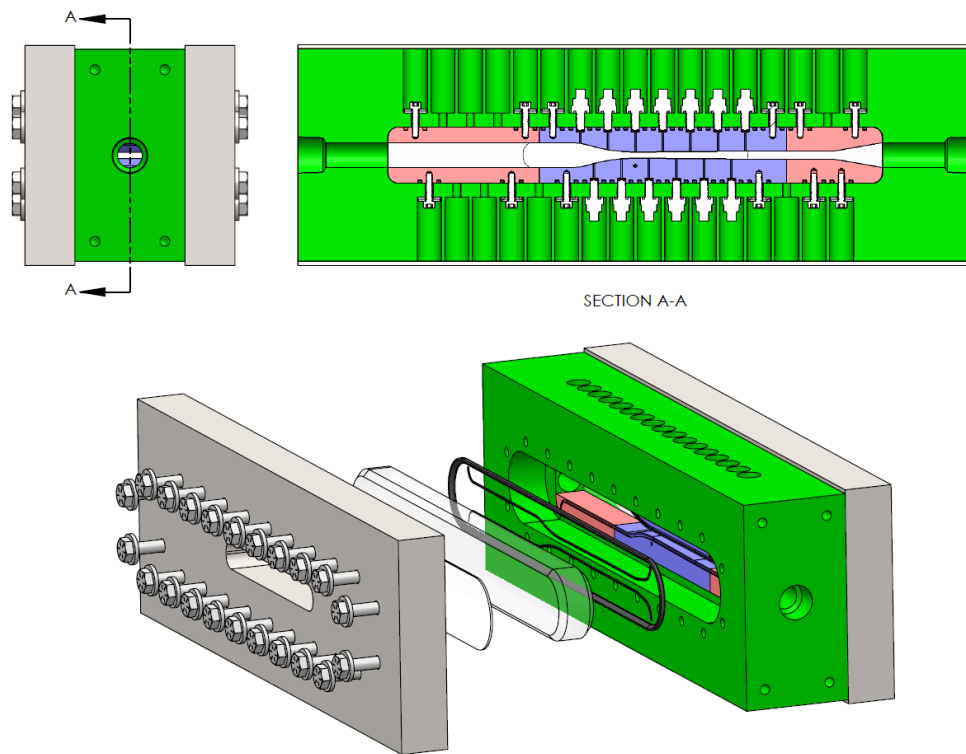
CAD model of test section: Top Image is a centerline cross section showing the purple nozzle inserts and the pressure transducers. Bottom image shows an exploded view of one of the two fused silica windows and sealing features
